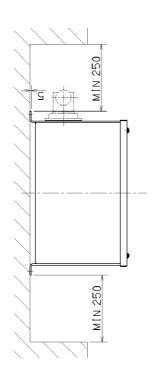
EXTERIOR DRAWING OF SCANNER UNIT, TYPE NKE-1052-9
